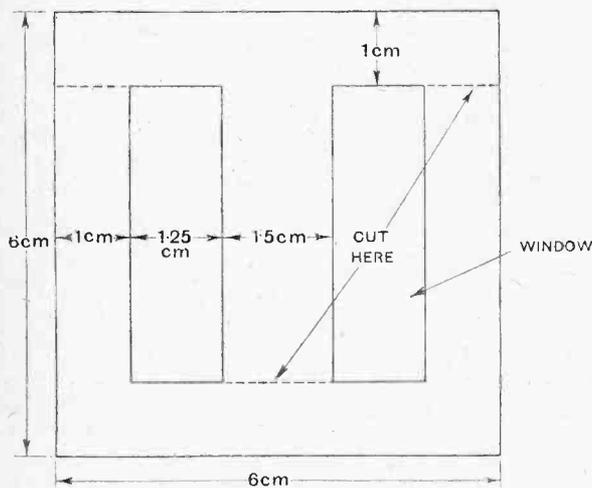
Dimensions of core stampings. The iron is 1.5 mils thick with 0.25 mil insulation on each side.
